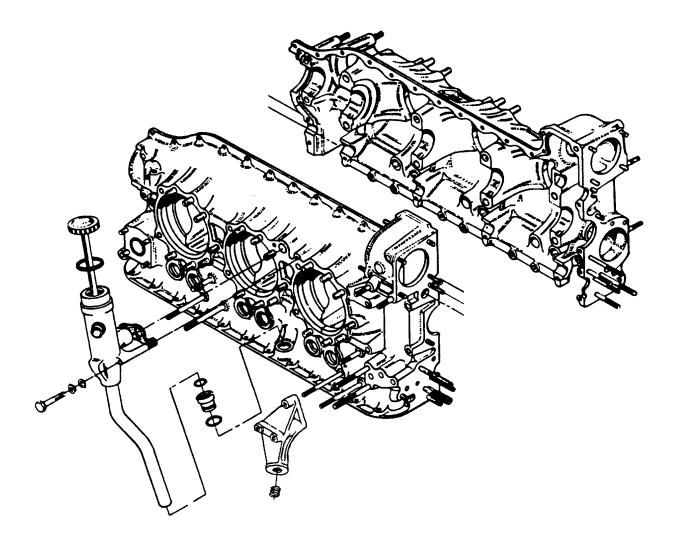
520/550 Permold Series Crankcase Exploded View
